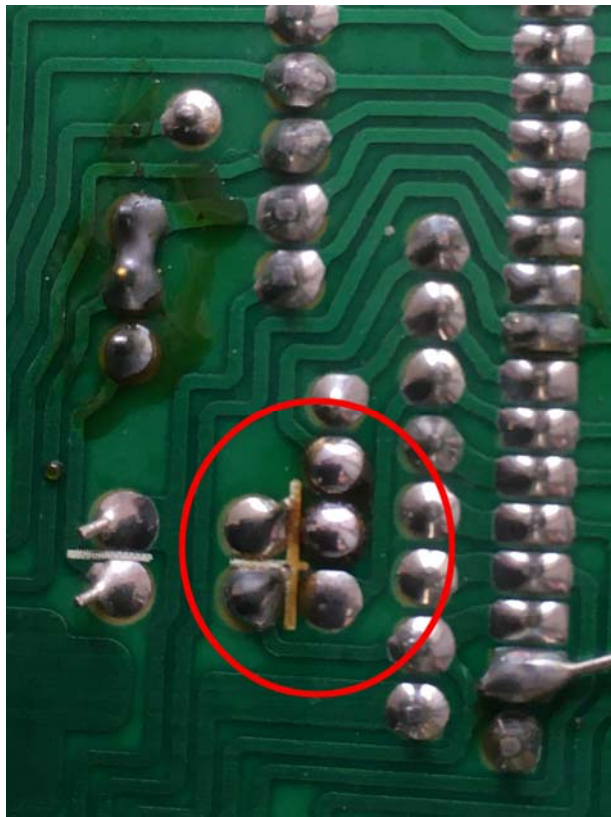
board track side detail (receiver fully unblocked).
